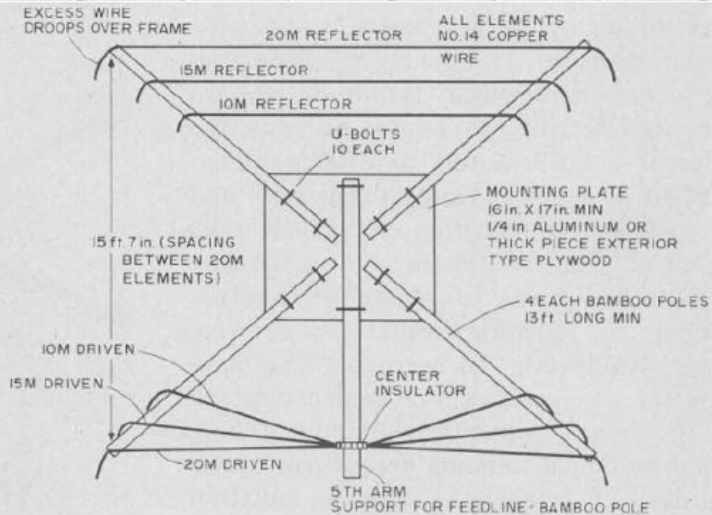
HOW TO MOUNT BAMBOO SUPPORT ARMS
